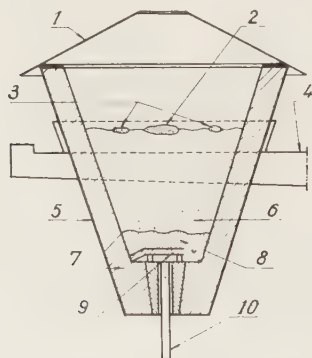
Thermit-pressure welding with plate. Crucible in which the thermit reaction takes place.
